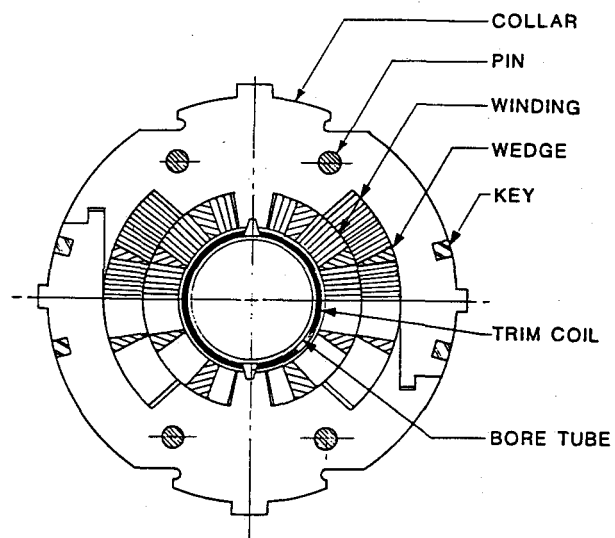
Cross section of collared coil assembly showing bore tube, main coils and stainless steel collar. The trim coil, mounted on the outer diameter of the bore tube, is not explicitly shown.
